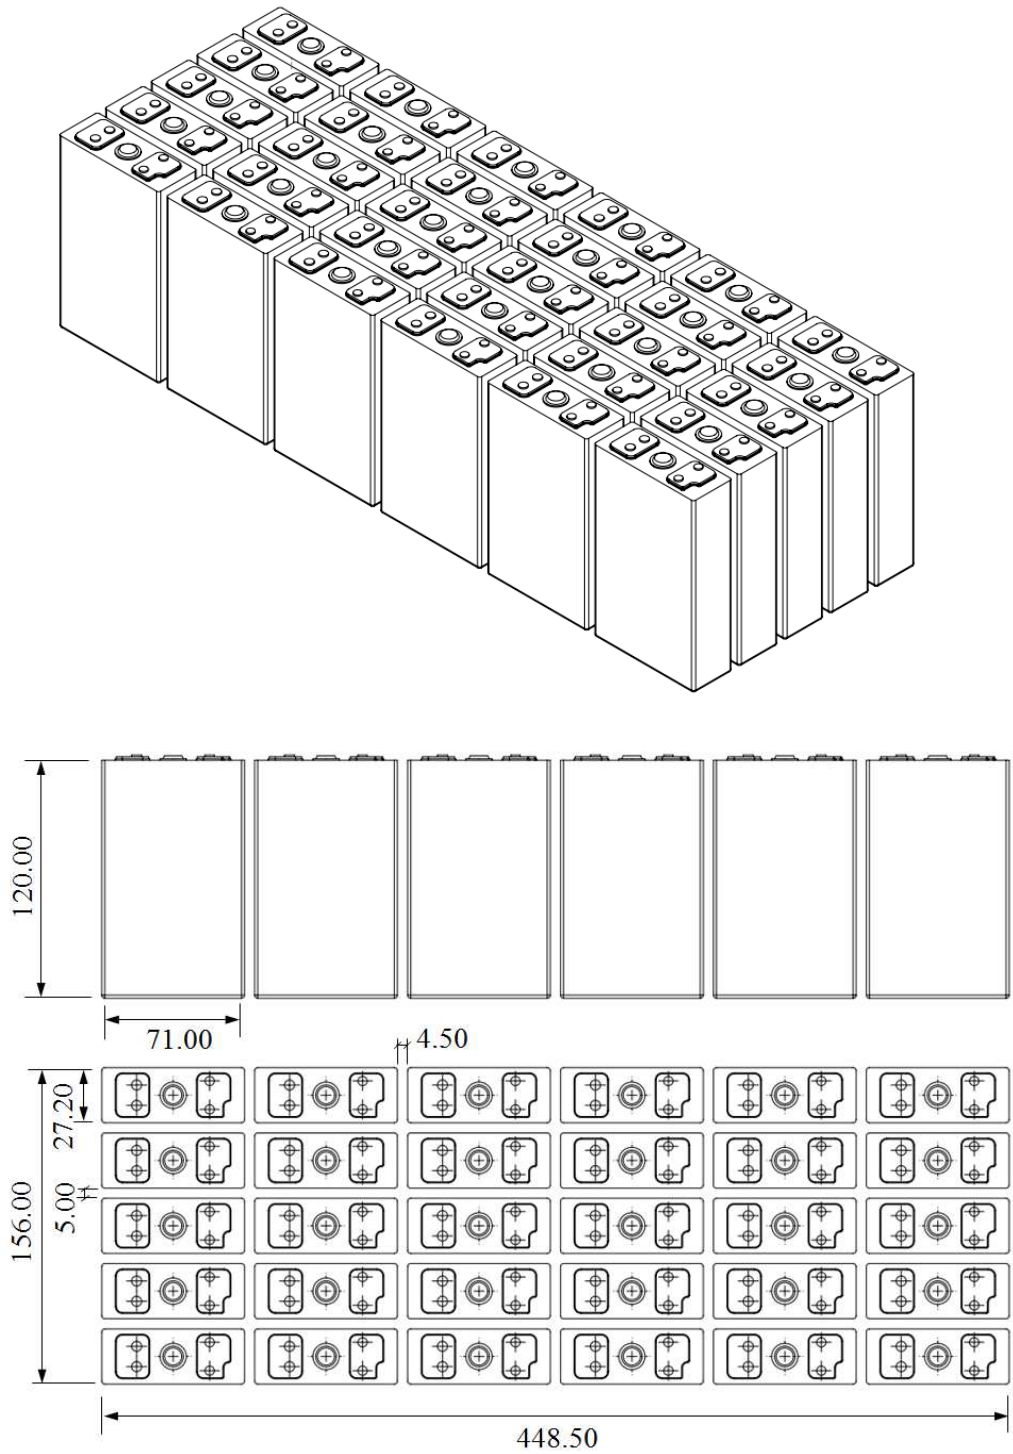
Dimensioned 30-cell battery pack (front and top view, dimensions in mm).
